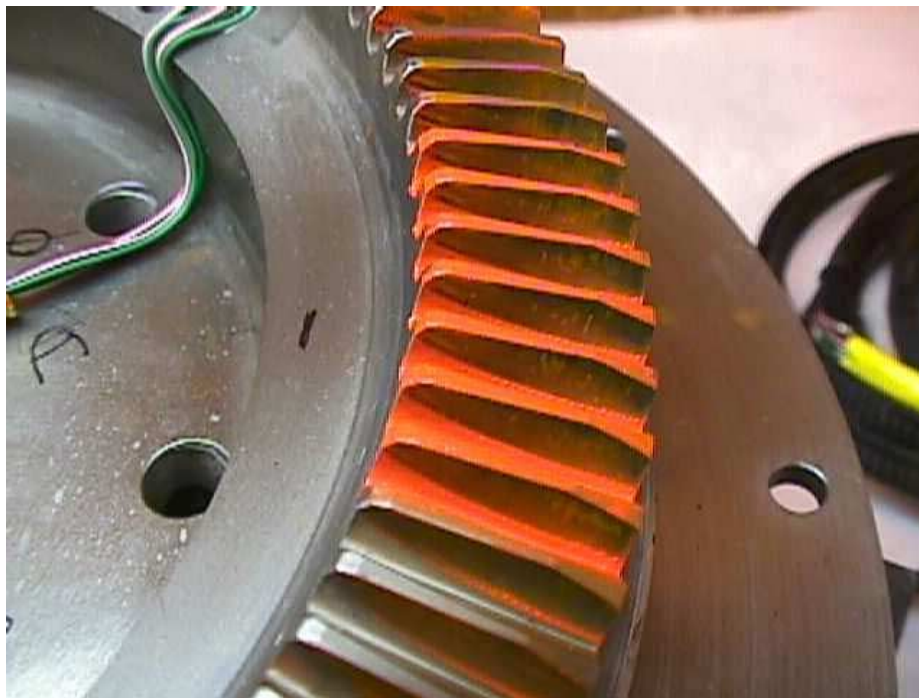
Upper face gear tooth patterns for Pinion 1 mesh.
